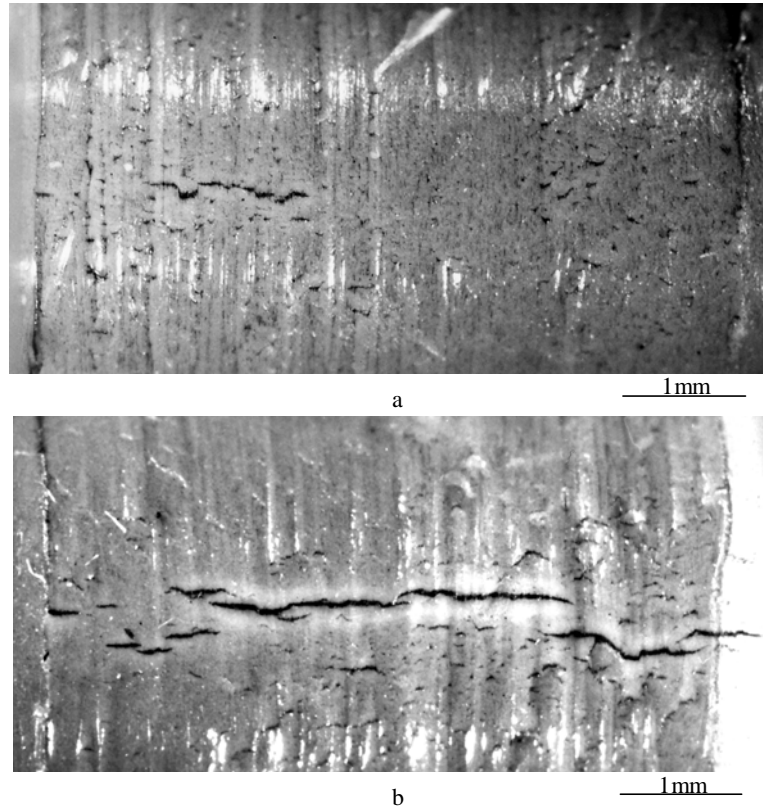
Two examples of fastener holes in an AISI 4340 steel wing carry-through beam. The views are of magnetic rubber casts of the holes and show indications of machining tears and associated fatigue cracks.
